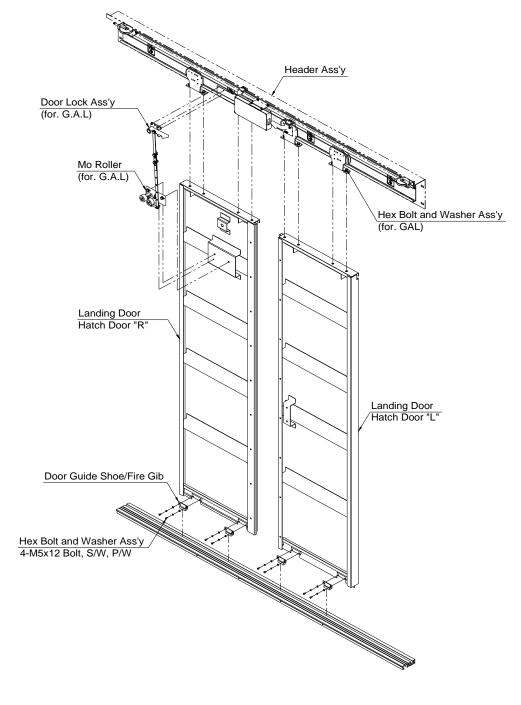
LANDING DOOR ASSEMBLY (C.P)
